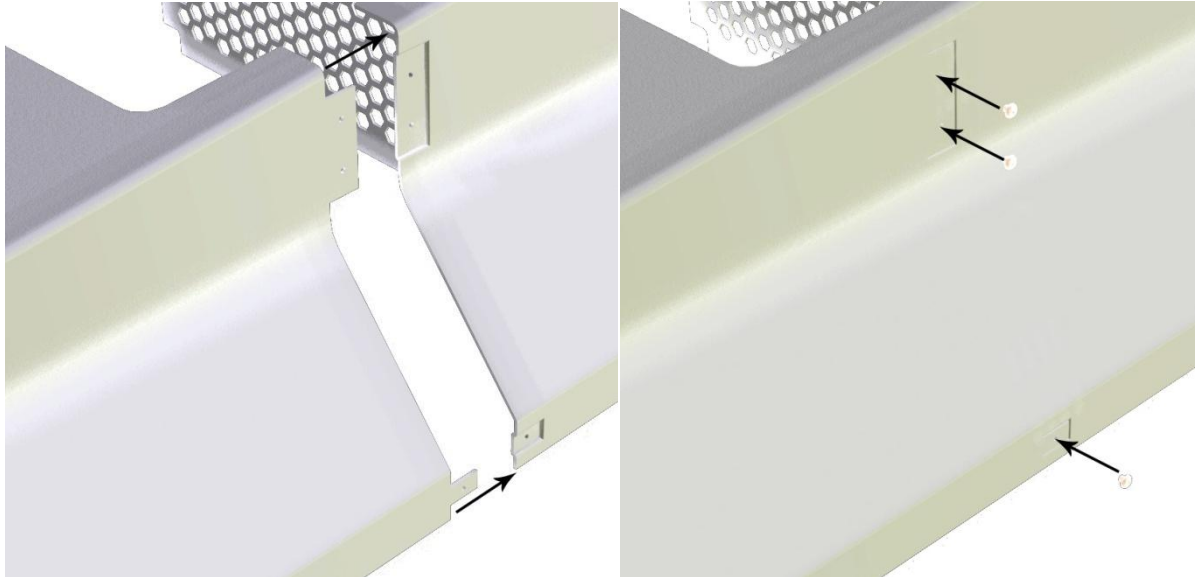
This image illustrates how the two parts of the casing are attached to each other. The front casing have four extended tabs with threaded holes that have matching dimples on the rear cover. When aligned the two parts can be screwed together using six M4 bolts.
